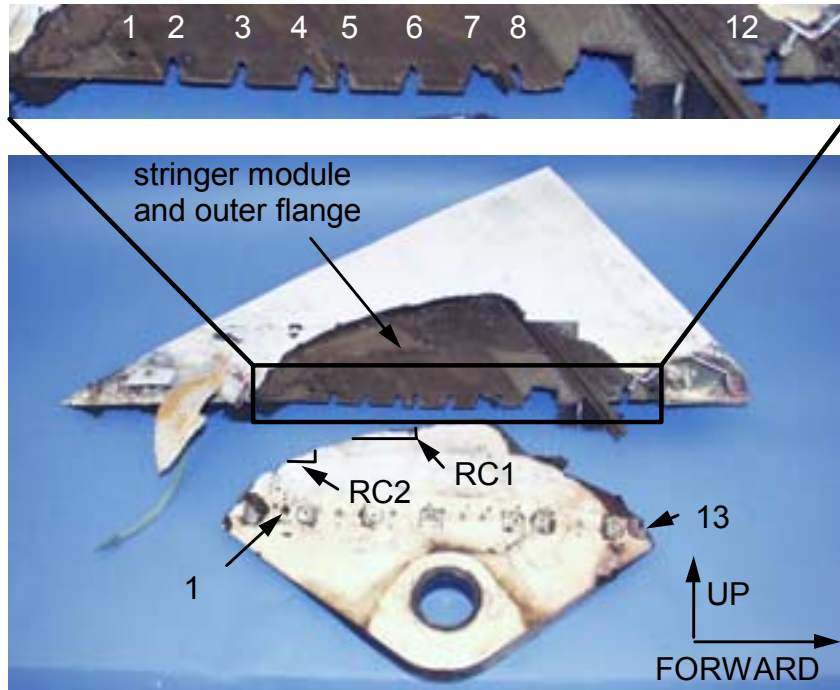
The right aft lug as viewed looking upward and forward. The fracture surface on the forward leg of the lug is shown in detail. Unlabeled arrows indicate bearing damage adjacent to the fracture.
